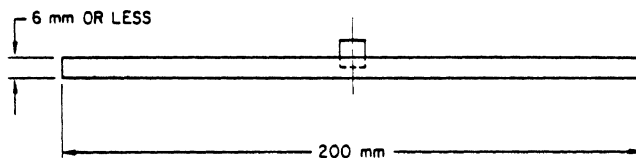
SUGGESTED DESIGN FOR RIGID DISC WITH ACCELEROMETER ASSEMBLY BONDED AT CENTER
